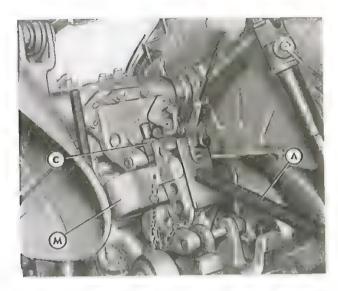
Checking the play between roller and quadrant using lever A 197016 (A) and the «GO-NOGO» gage C 497015 (C) which locks the upper link support in position thus keeping spring M under load.
